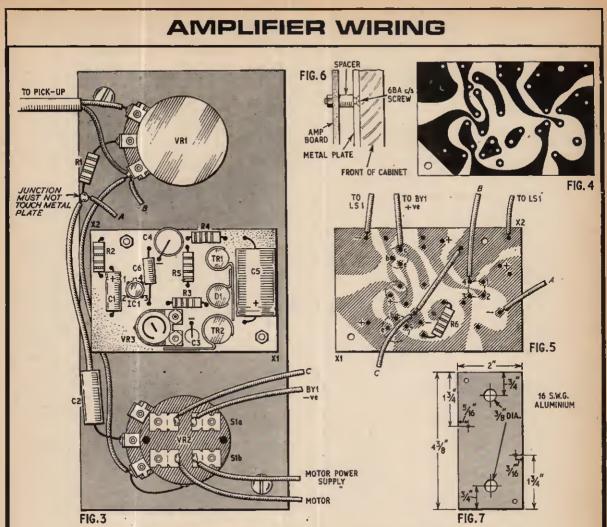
The completed amplifier assembly, showing the circuit board mounted on the metal plate, together with the controls VRI and VR2
